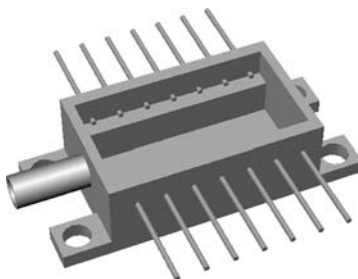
Butterfly package used for the packaging of transmitters, pump lasers, edge detectors. Internal package dimensions are: 18.9 mm × 10.2 mm × 6.4 mm.
